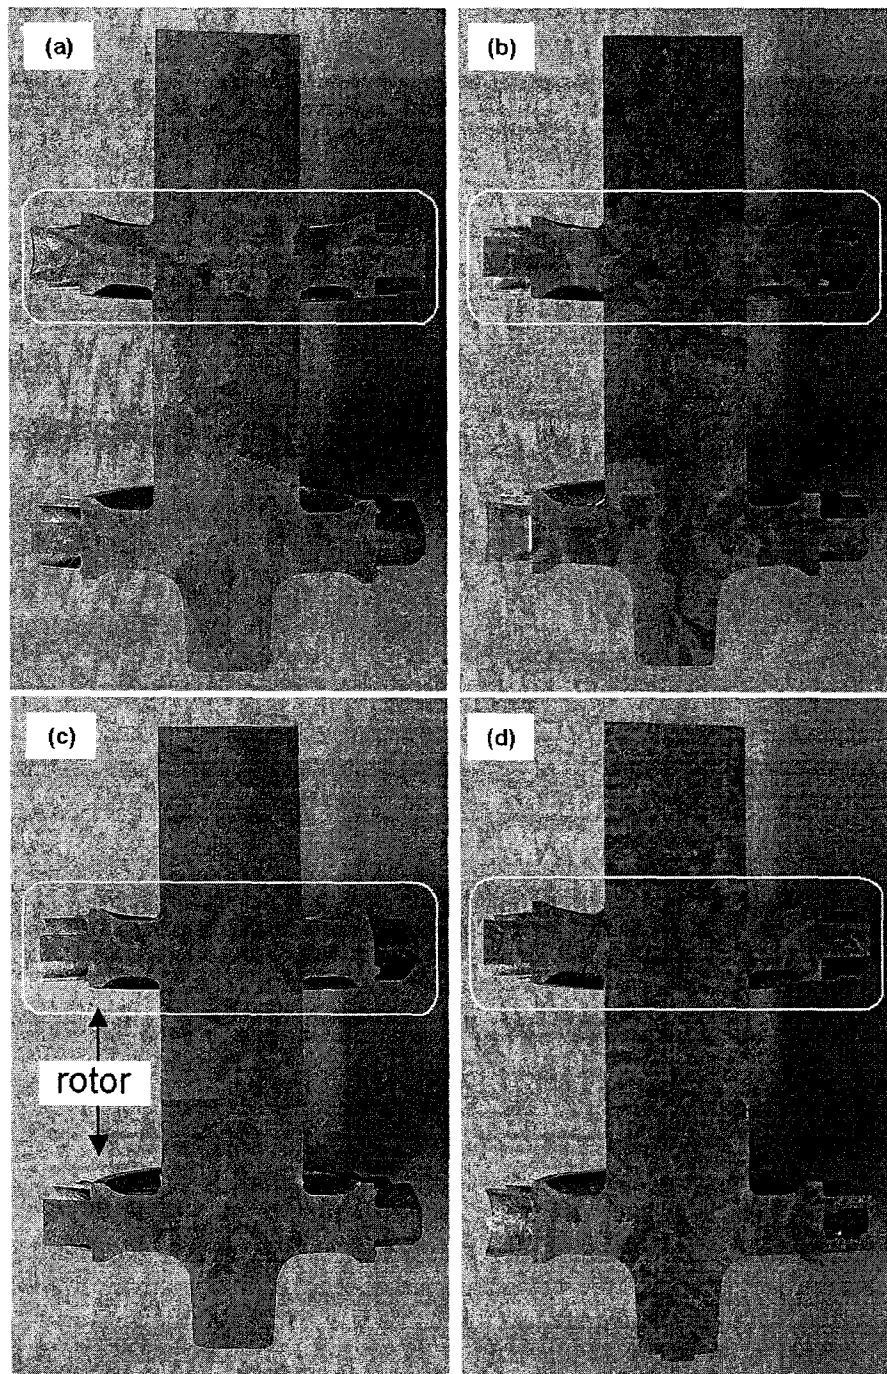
Sectioned micrographs of integral rotor casting. (a) XX, (b) VX, (c) XI and (d) VI casting condition
